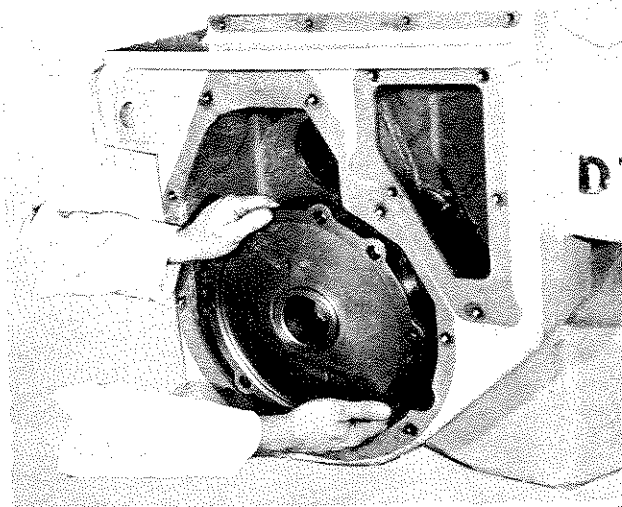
Installation Of Brake Shaft (Sheet 1 of 2)
